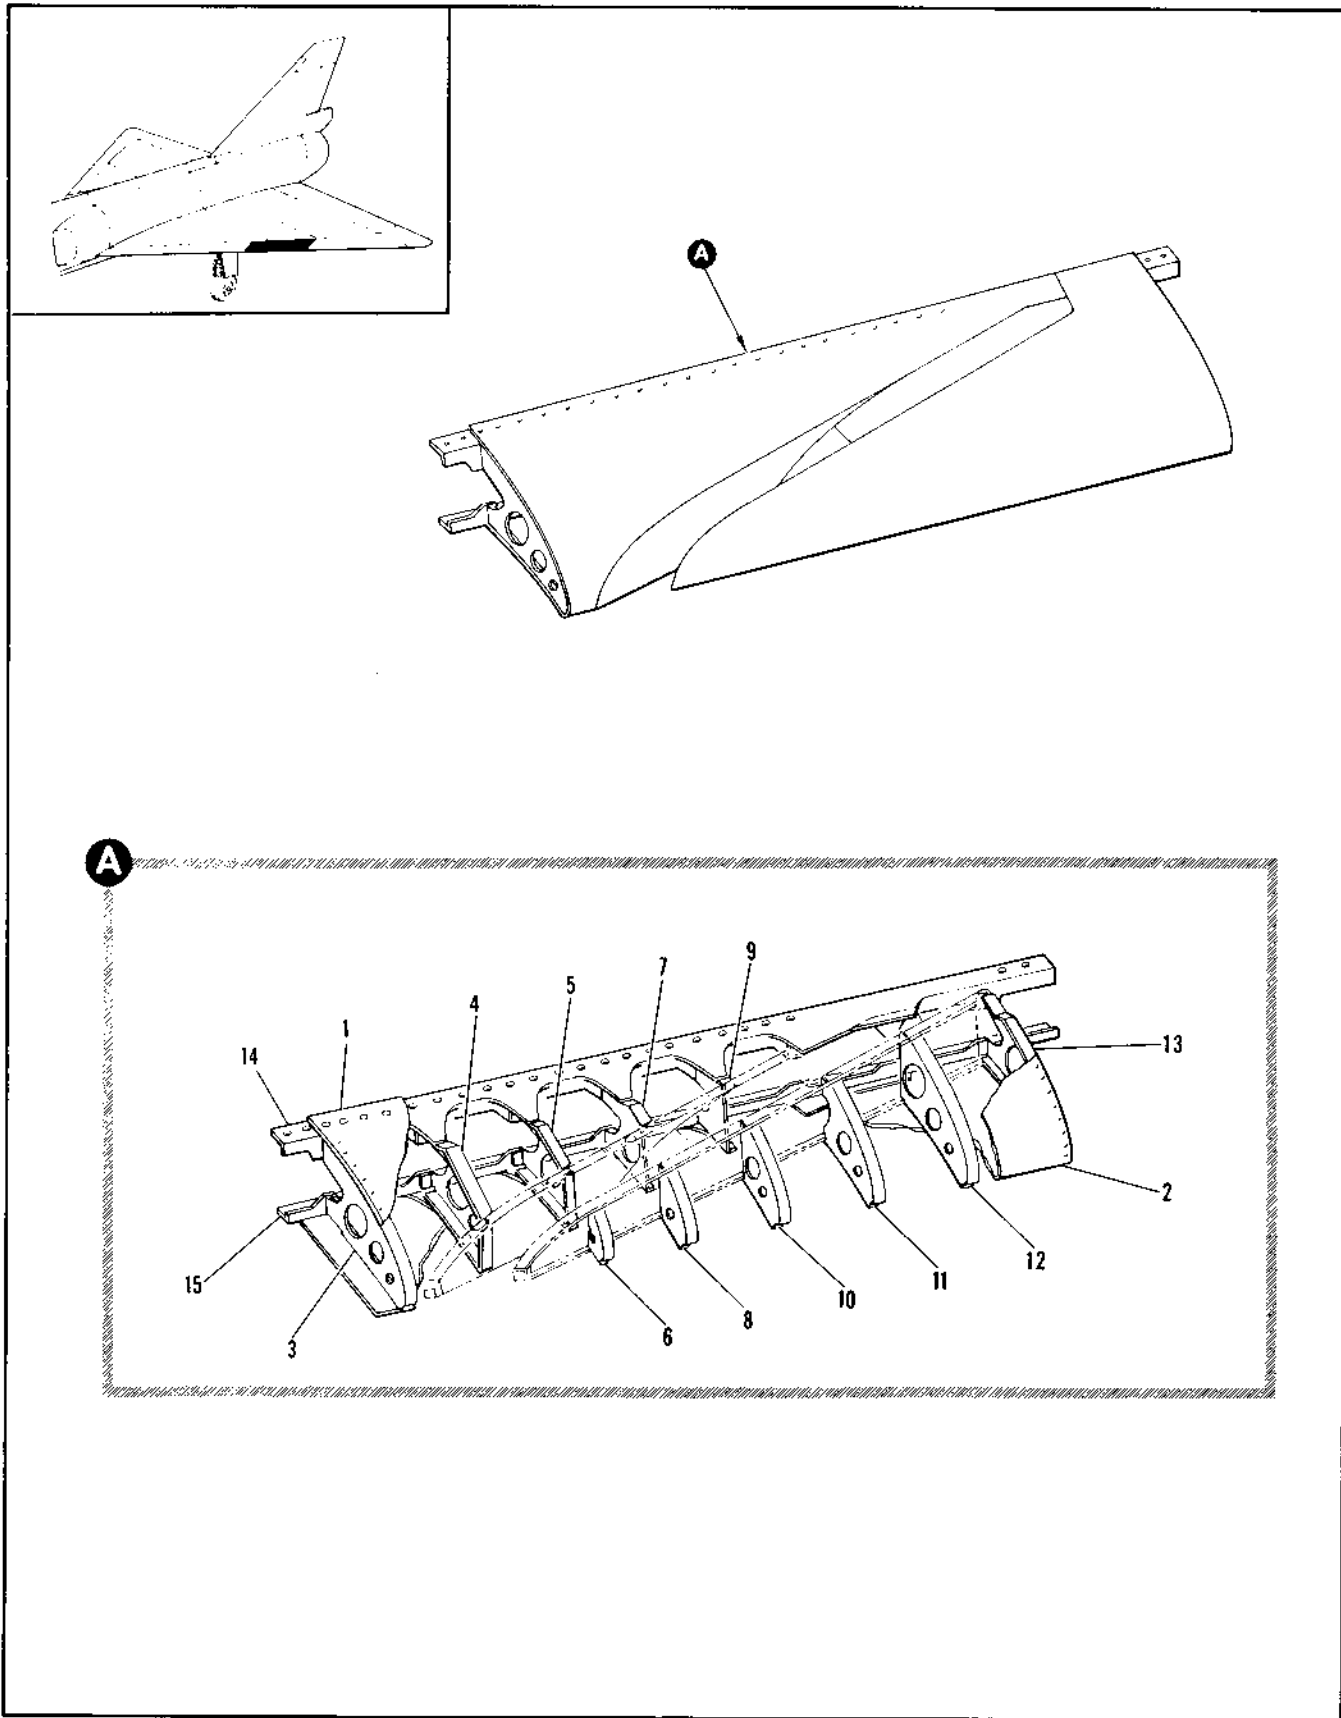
Wing Slotted Leading Edge Assembly Sta 301 to 334
